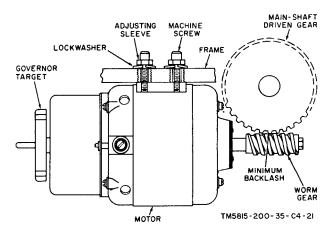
Motor gears backlash adjustment (TT-98C/FG).
